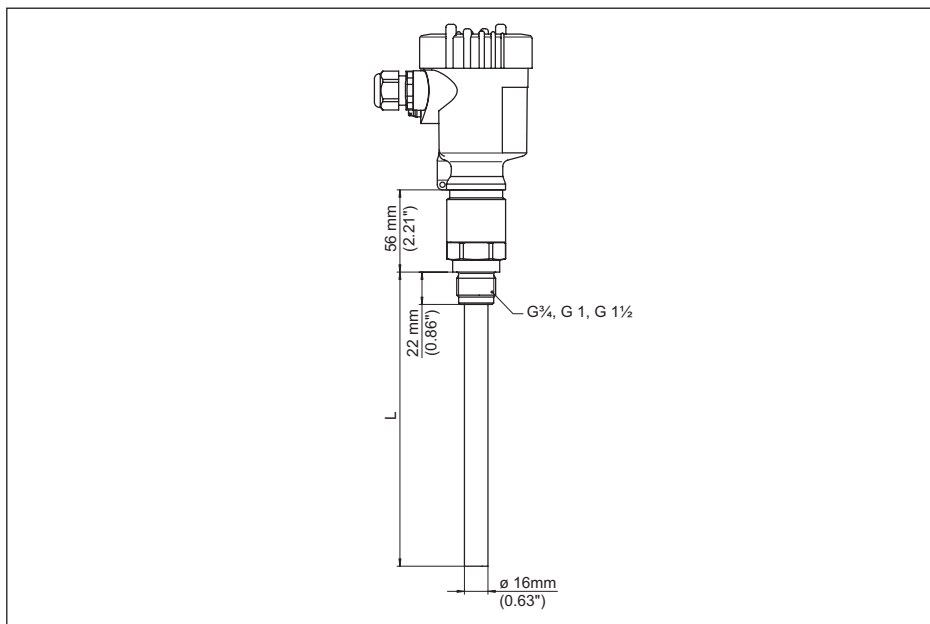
VEGACAP 63, threaded version G1 (ISO 228 T1)
